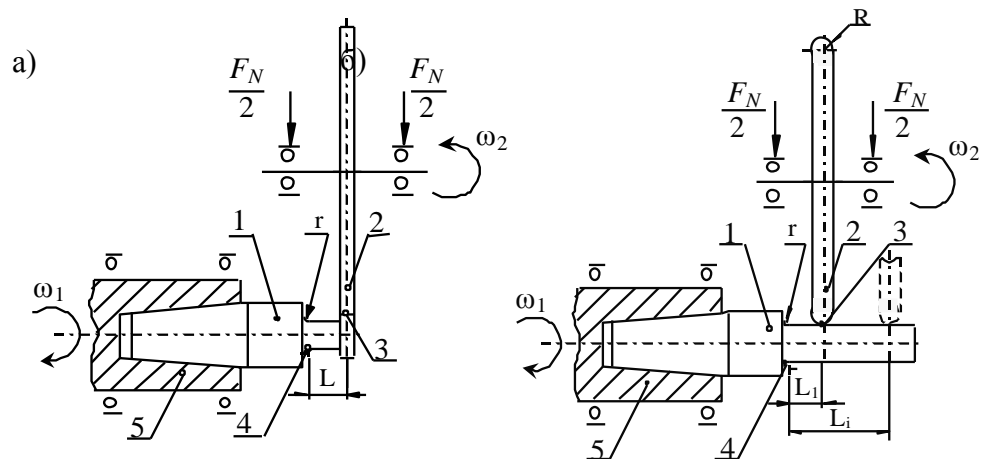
Model of gears (a) and its modification (b): 1 - sample-model of the tooth; 2 - countersample; 3 - contact zone; 4 - bending zone; 5 – testing machine spindle
